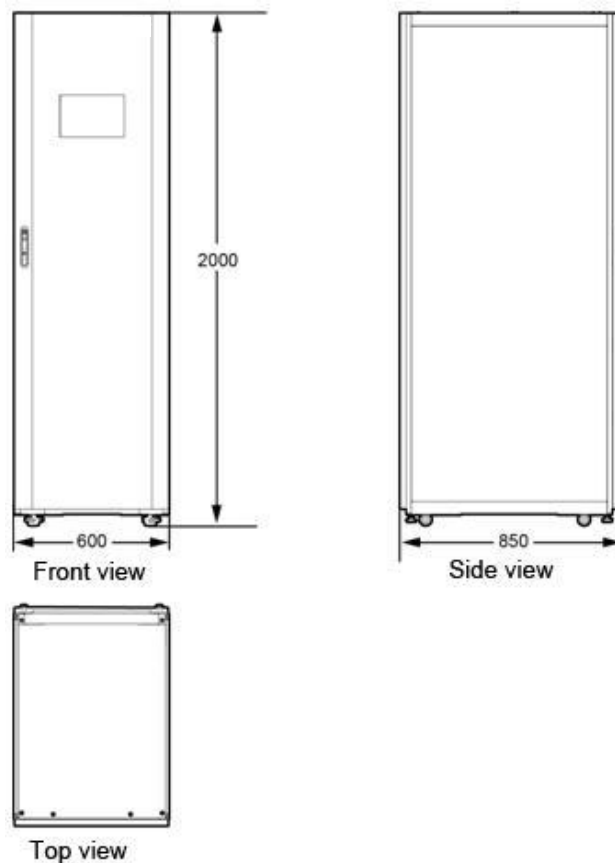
400 kVA/500 kVA UPS dimensions (mm)
